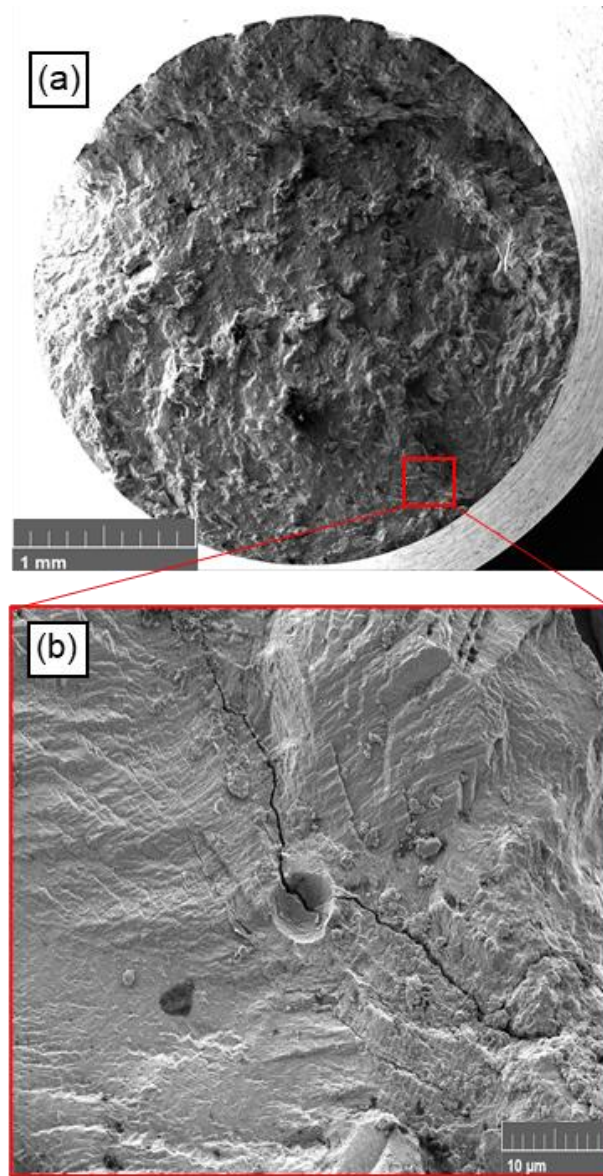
SE fracture surface images of a machined V LB-PBF Inconel 718 specimen tested at $\sigma_a = 500$ MPa with a corresponding fatigue life of $2N_f = 1.04 \times 10^8$ reversals. The overall fracture surface in (a) presents the possibility of multiple crack initiation sites, such as the remnant of an entrapped gas pore shown in (b).
